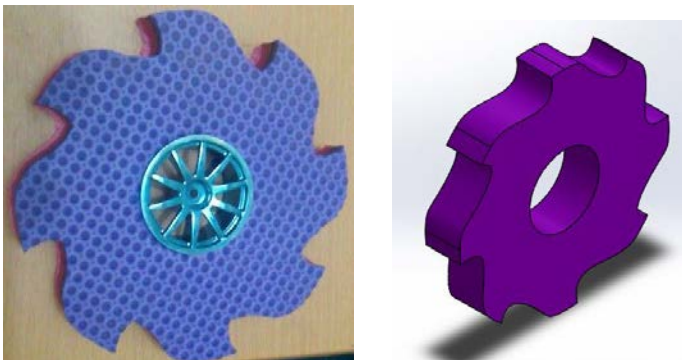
Photograph taken from the wheel used in our mining truck and 3D model
